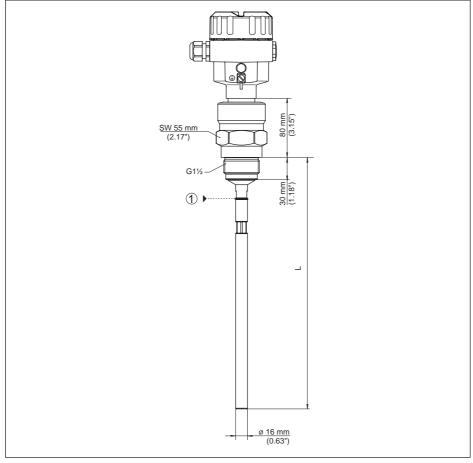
NivoGuide 3100, rod ø 16 mm (0.63 in), threaded version
